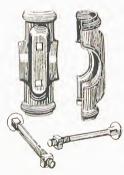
Illustrating Chuck Split-Cross, showing the various pieces before assembling.
